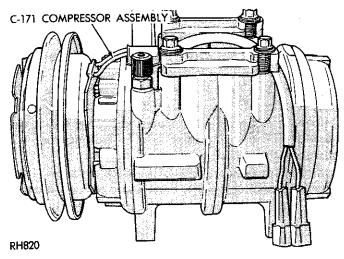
A/C Clutch Assembly, C-171 Compressor
